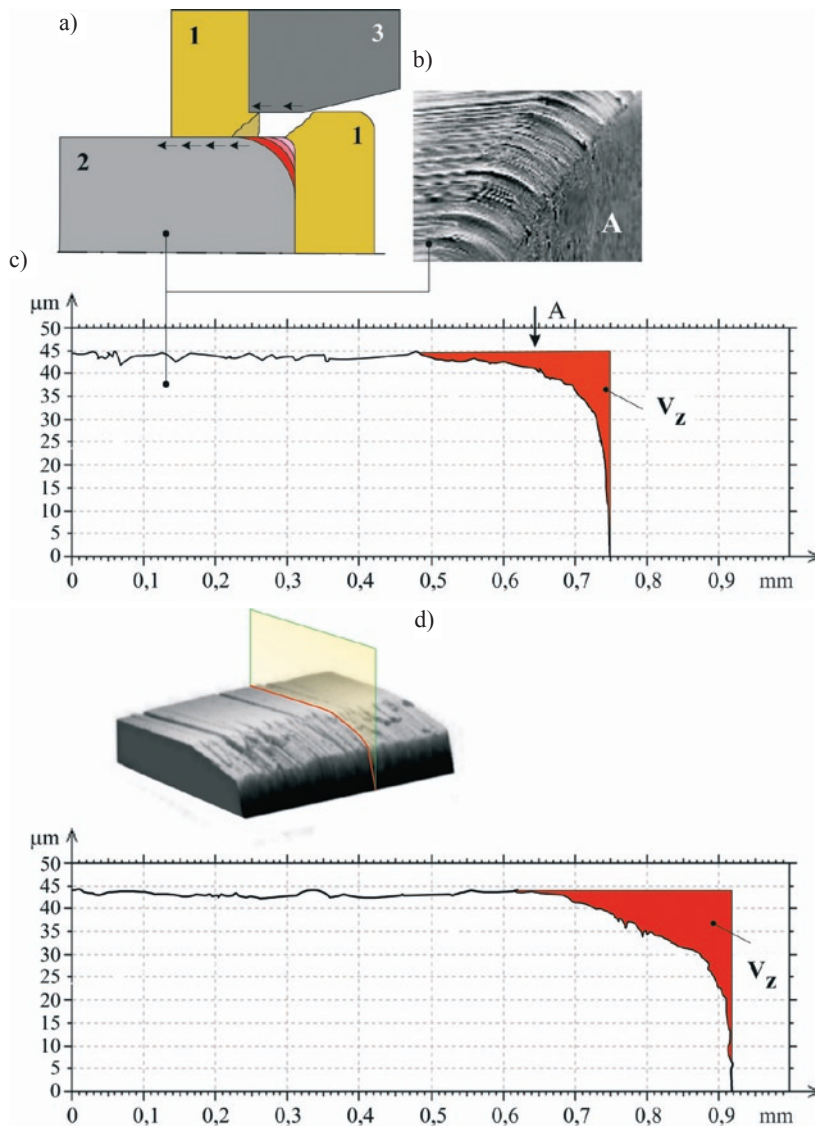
Tool cutting edge changes after 800 000 cuts: a) conventional wear process (1-sheet, 2-punch, 3-shearing die), b) structure of degradation, c) punch profile for the $L_z=8\%$ clearance; d) punch profile for the $L_z=0\%$ clearance
